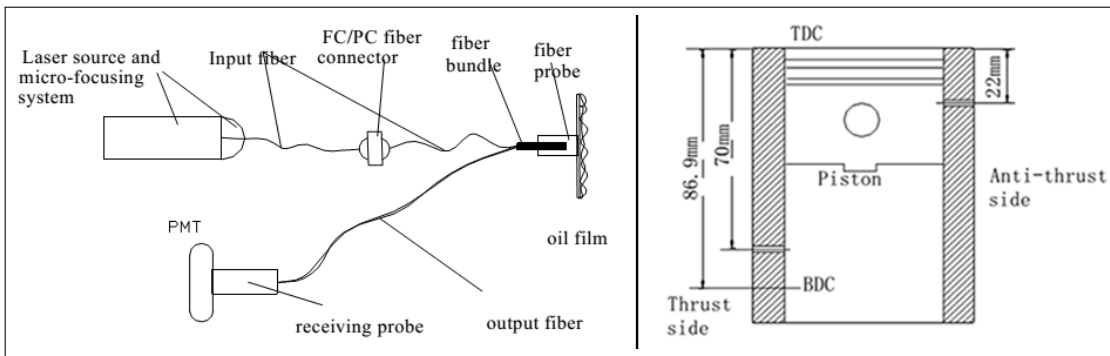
Schematic drawing of oil film thickness measuring equipment and position of the fiber probe [5].
